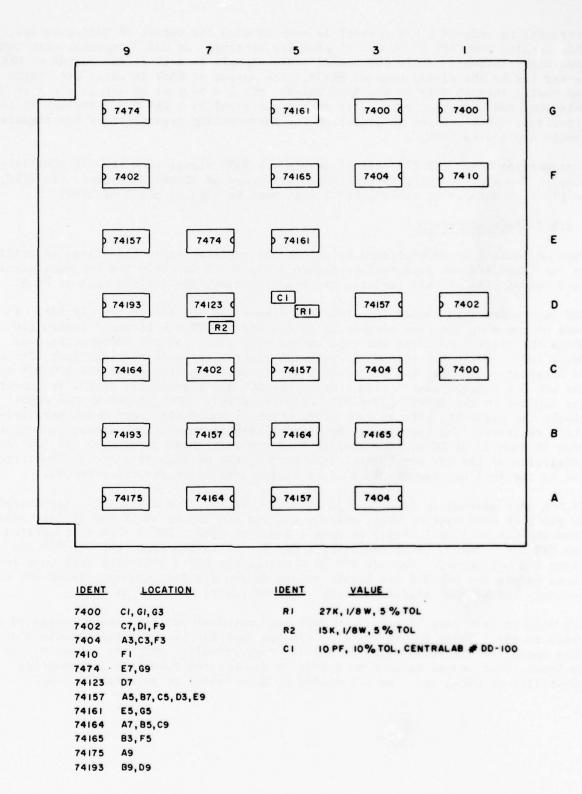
NCU Ancillary Board, Parts Layout Diagram and Parts List
